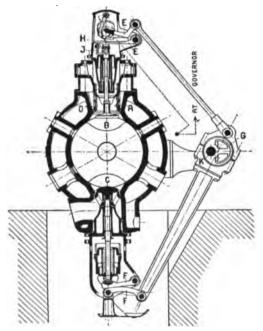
Valve Gear and Governor. Machinen-Fabrik Augsberg-Nürnberg A. G.
